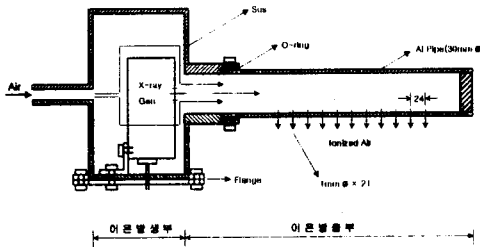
Outline View of Ionized Air Nozzle Type Ionizer
